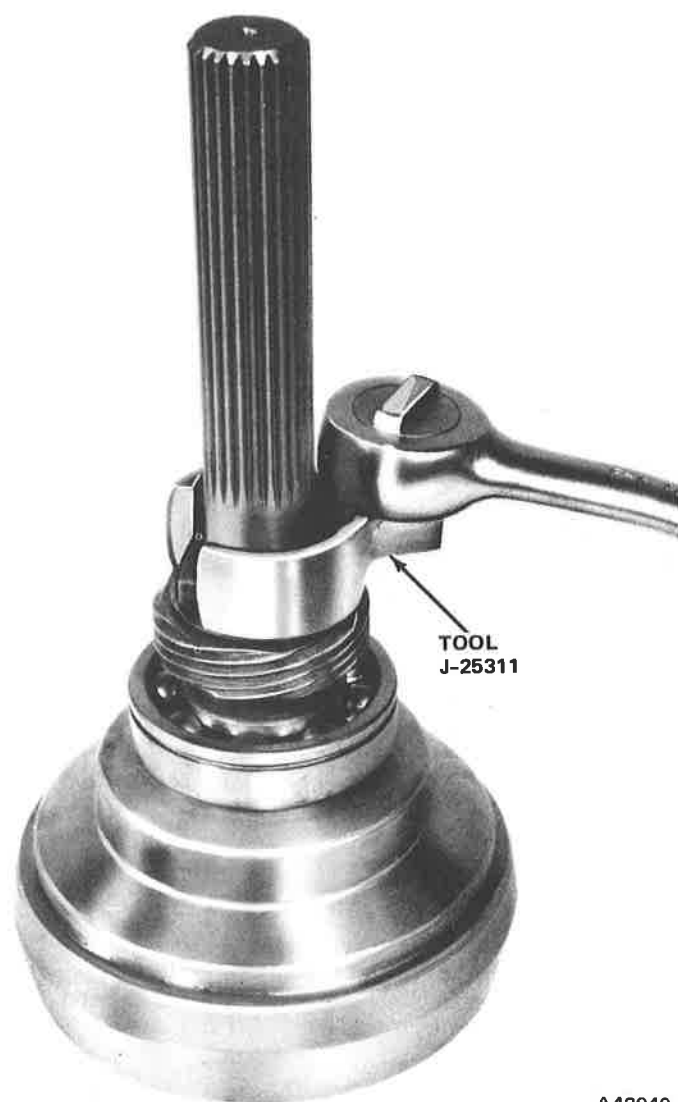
Speedometer Gear Locknut Removal and Installation
